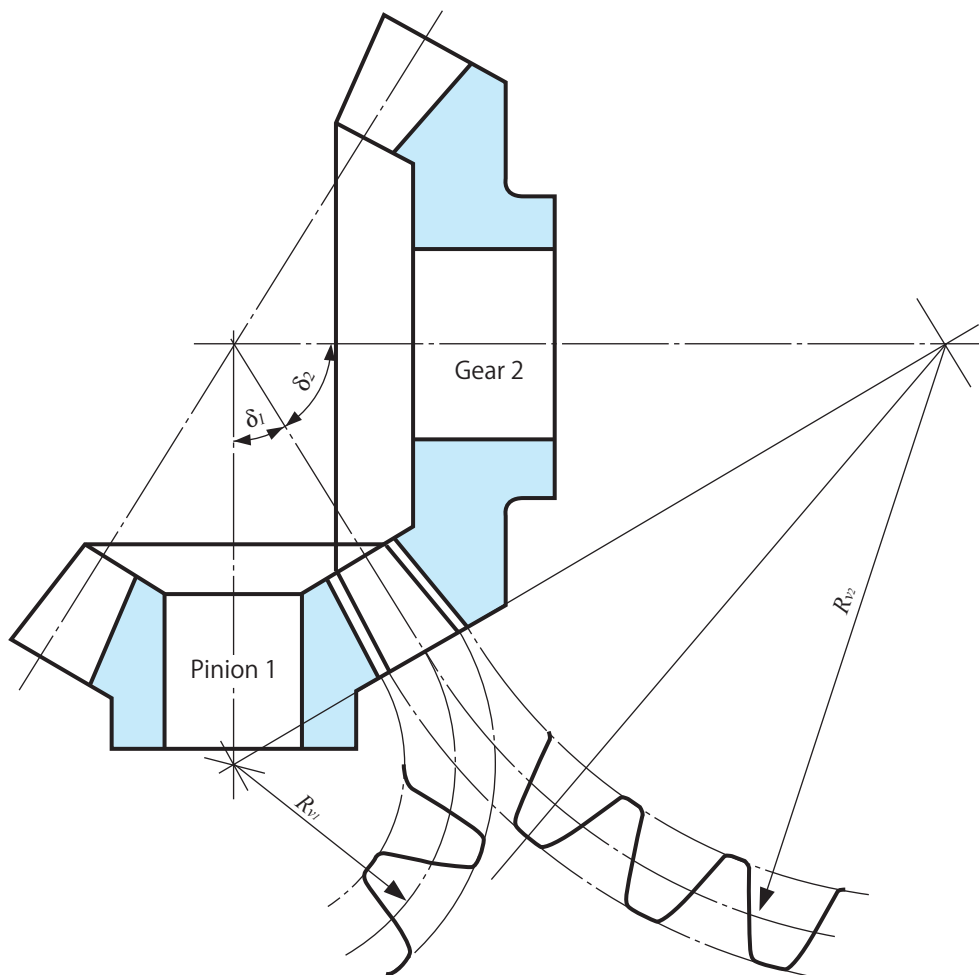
Virtual spur gear⁽¹⁾ for Bevel gear
